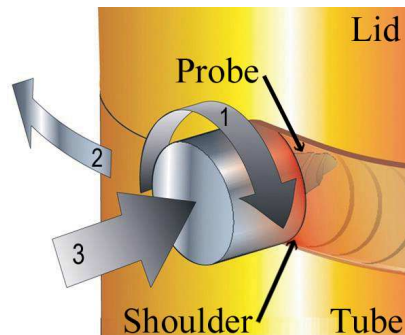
Illustration of the Friction Stir Welding process to seal copper canisters.
